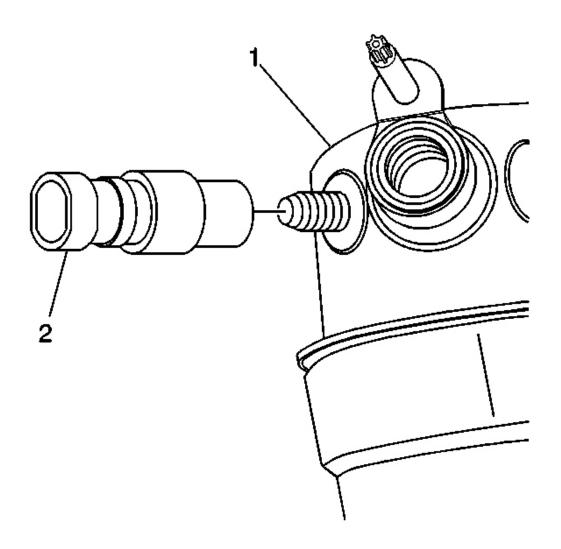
View Of A/C Low Pressure Switch Courtesy of GENERAL MOTORS CORP.
